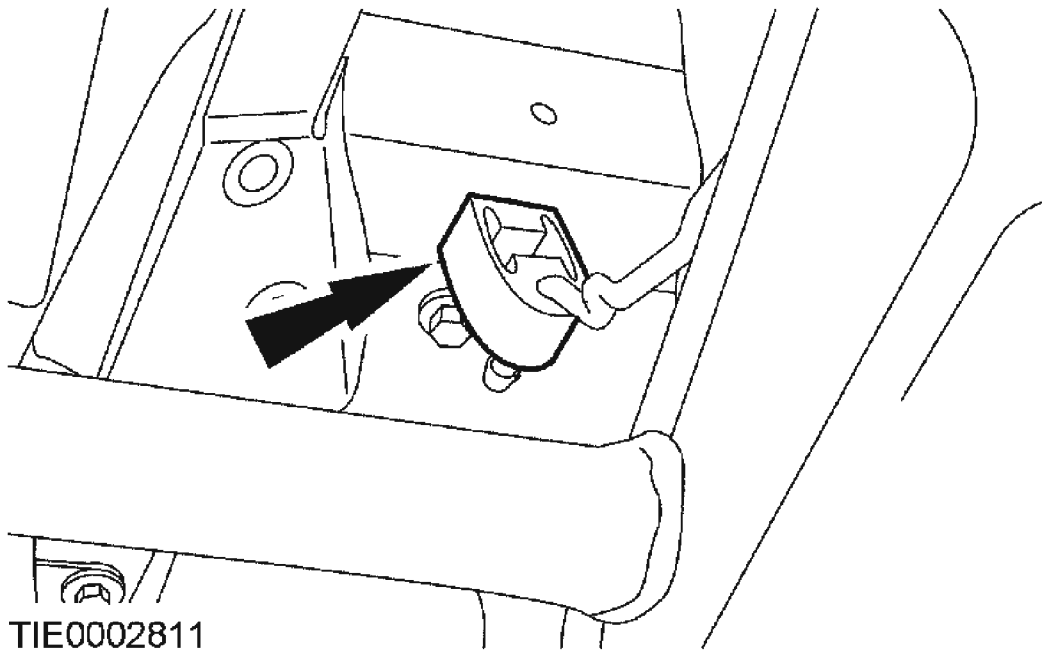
Installing Front Muffler To Front Exhaust Hanger Insulator
